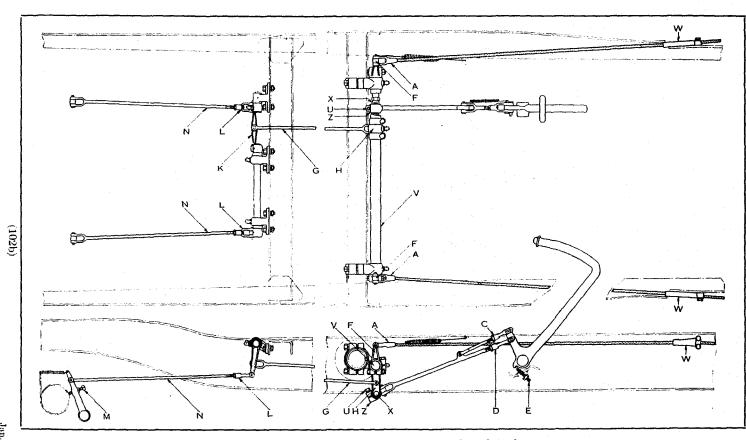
V-63 Foot Brake Rods to Rear Wheel Brakes (First Type)
